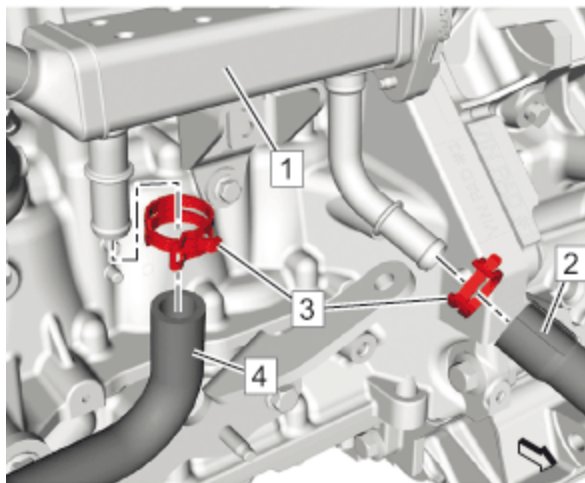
EGR Cooler, EGR Cooler Water Bypass Outlet Hose, Heater Inlet Hose And Clamps
